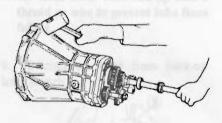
Removing Main Drive Bearing Snap Ring
